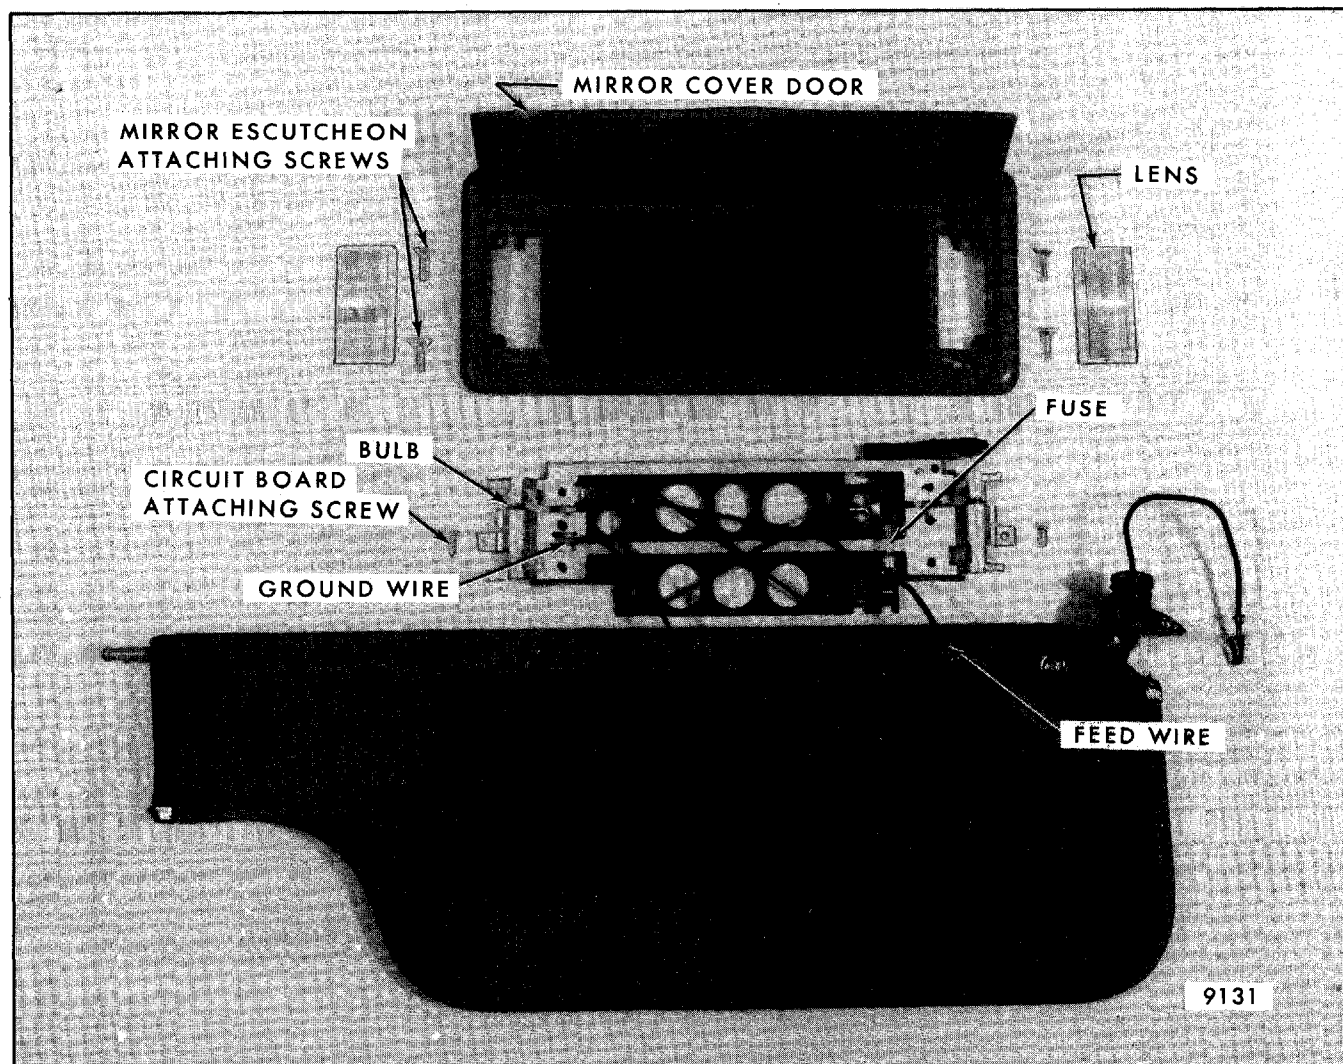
Vanity Mirror and Lamp Assembly
